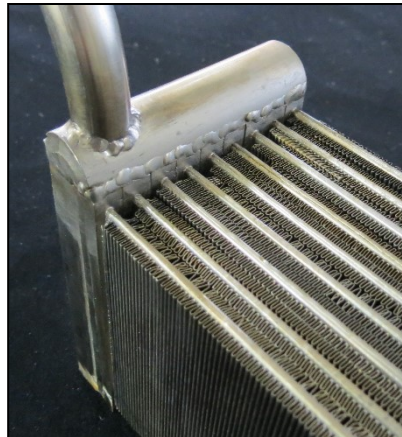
Full heat exchanger core assembly, showing multiple cells welded together and capped with a semicircular flow channel.
